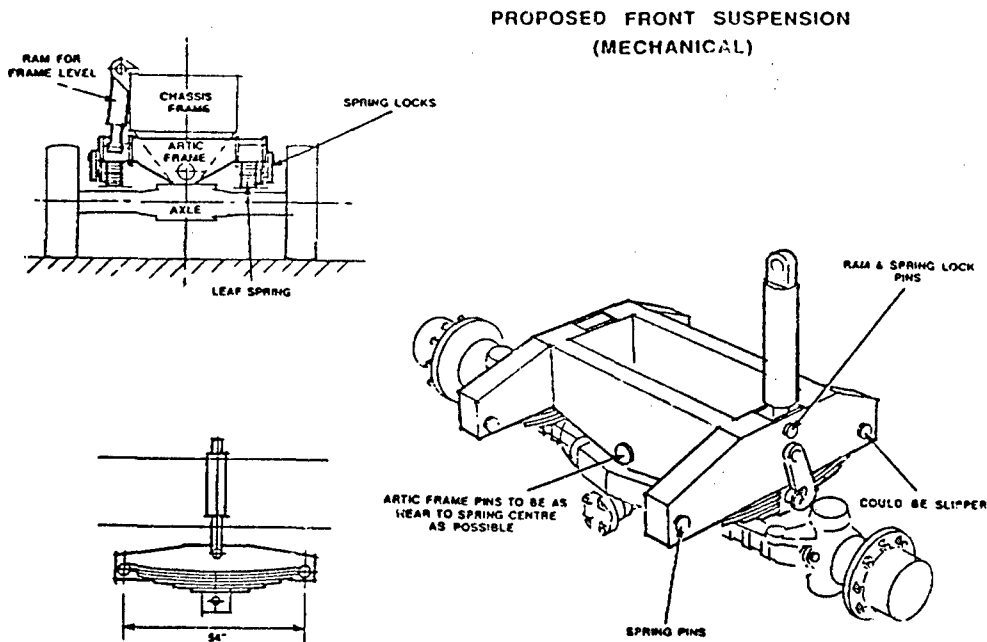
Alternate Design Front Axle Suspension
